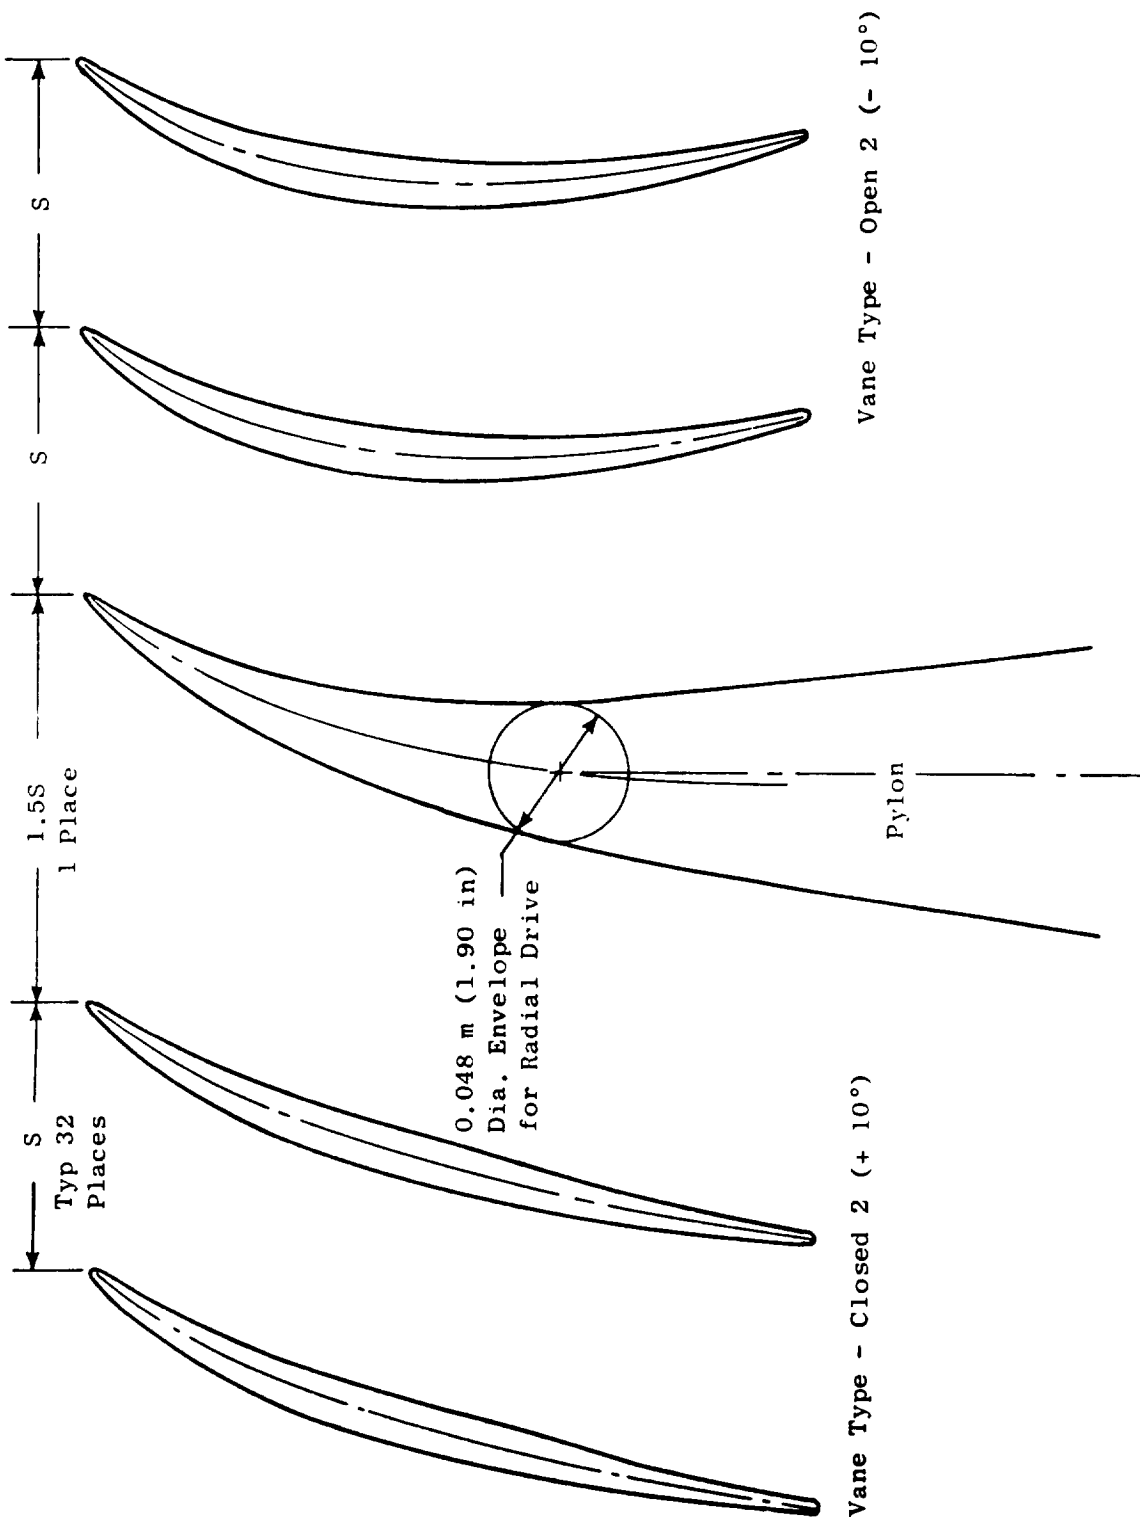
Vane-Frame (Fan Bypass OGV) Unwrapped Section at ID - Detail Near Pylon LE Fairing.
